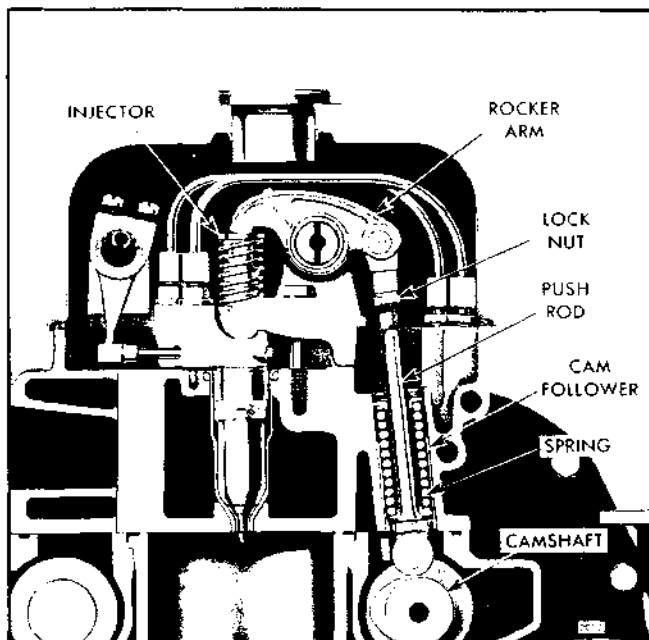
Injector Operating Mechanism (In-Line Engine Shown)
